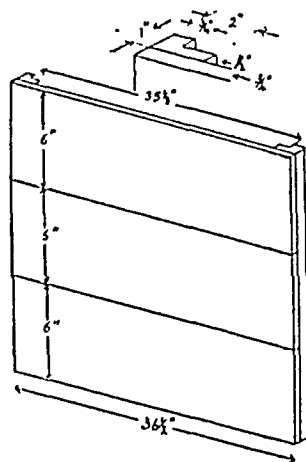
Fracture bed boards. Three such boards required for each bed. Designed for Lawson-Tait bedsteads with frames 72 inches by 35 inches.
